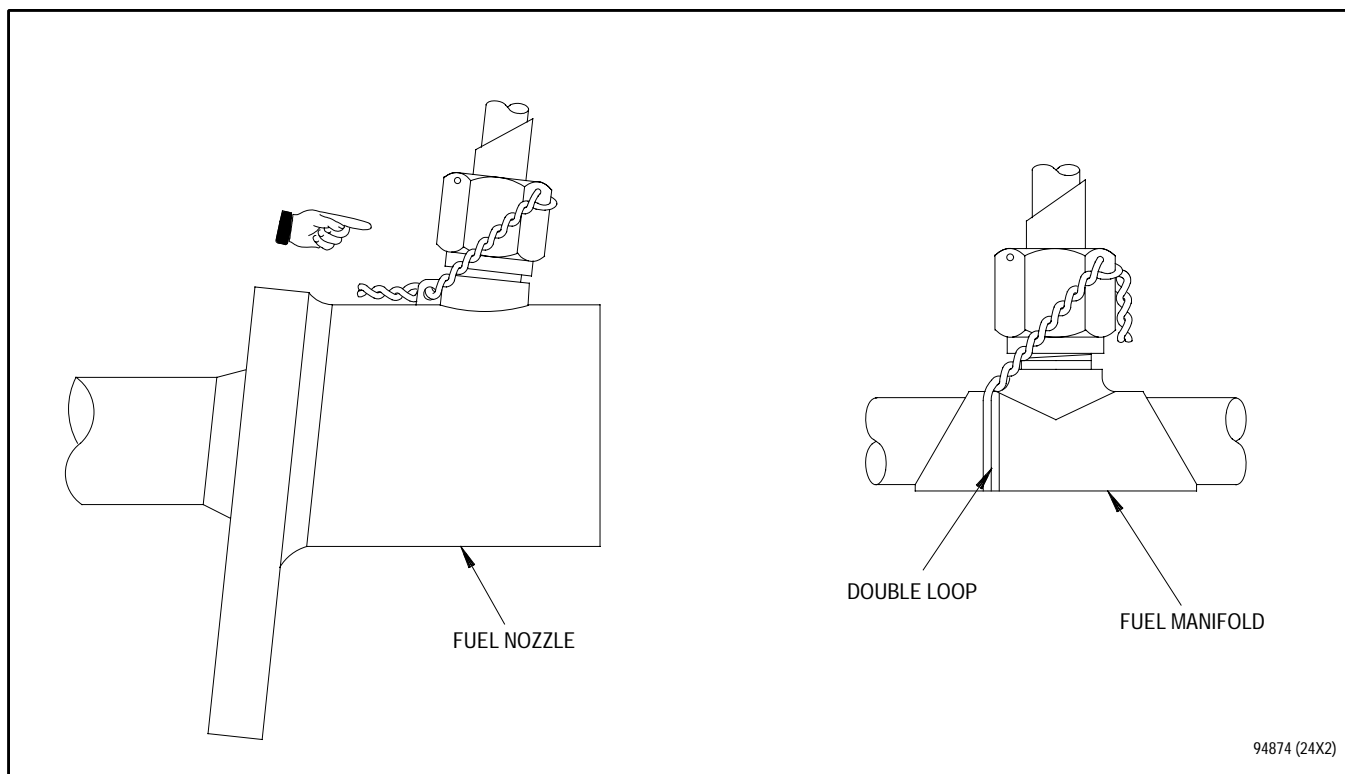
Fuel Supply Tube Coupling Nut Lockwire Configuration
